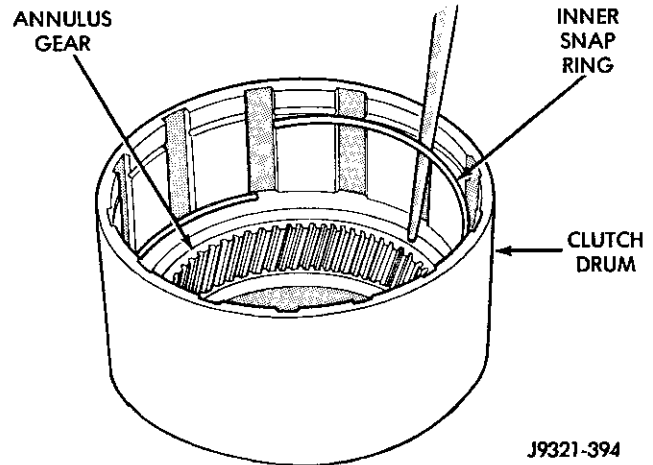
Clutch Drum Inner Retaining Ring Installation
